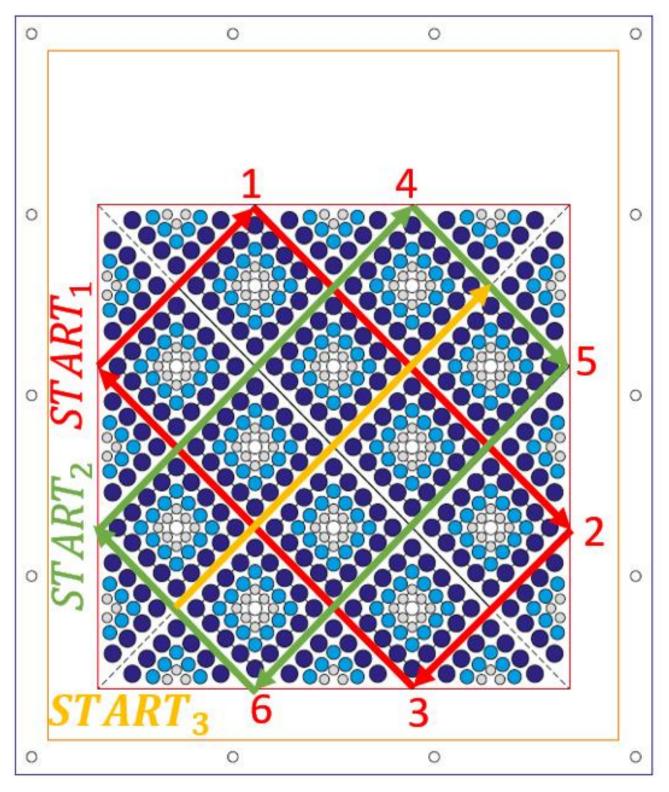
This is a real draw example of a machining part for Rodella. The red lines represent the path the machine has to cover to complete the seam.
